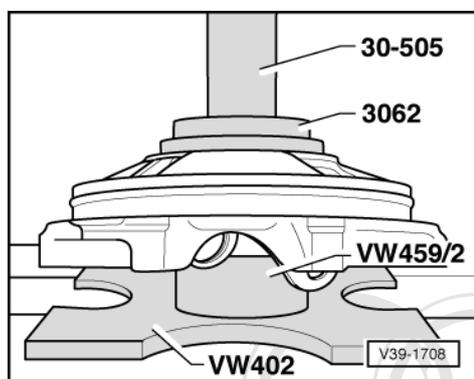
> Driving outer race for small taper roller bearing into gearbox housing
